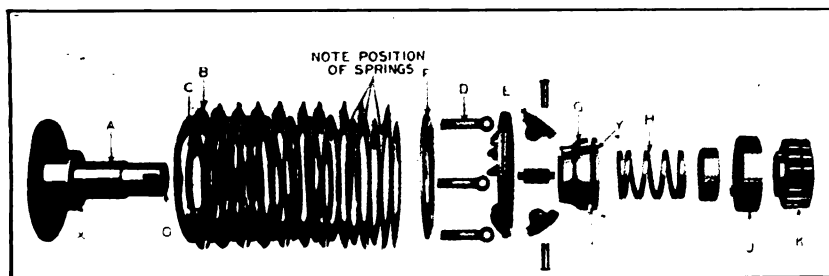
Multiple Disc Clutch Disassembled to Make Clear the Operation of Parts and Method of Adjustment.
